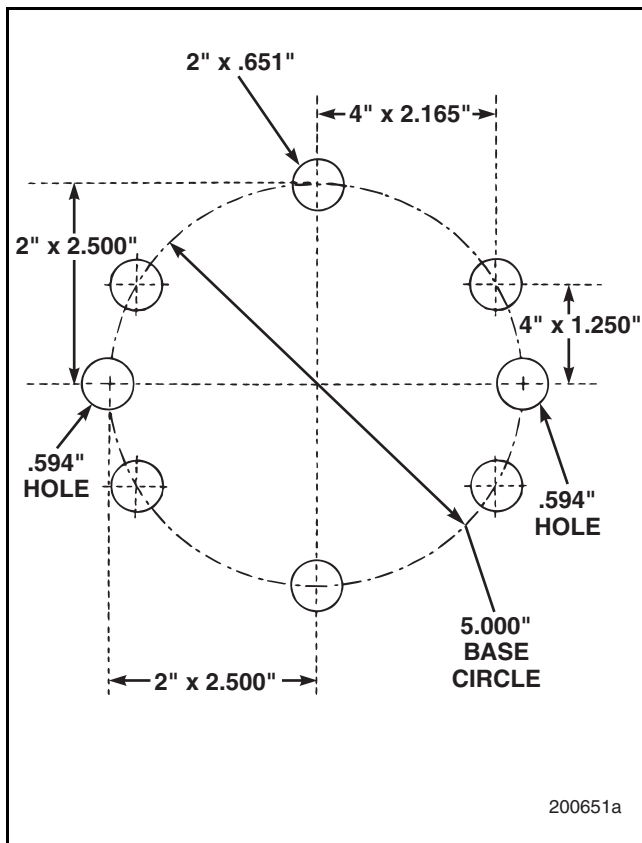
Dowel Pin Hole Dimensions (Flywheel or Torque Converter Drive Flange)
